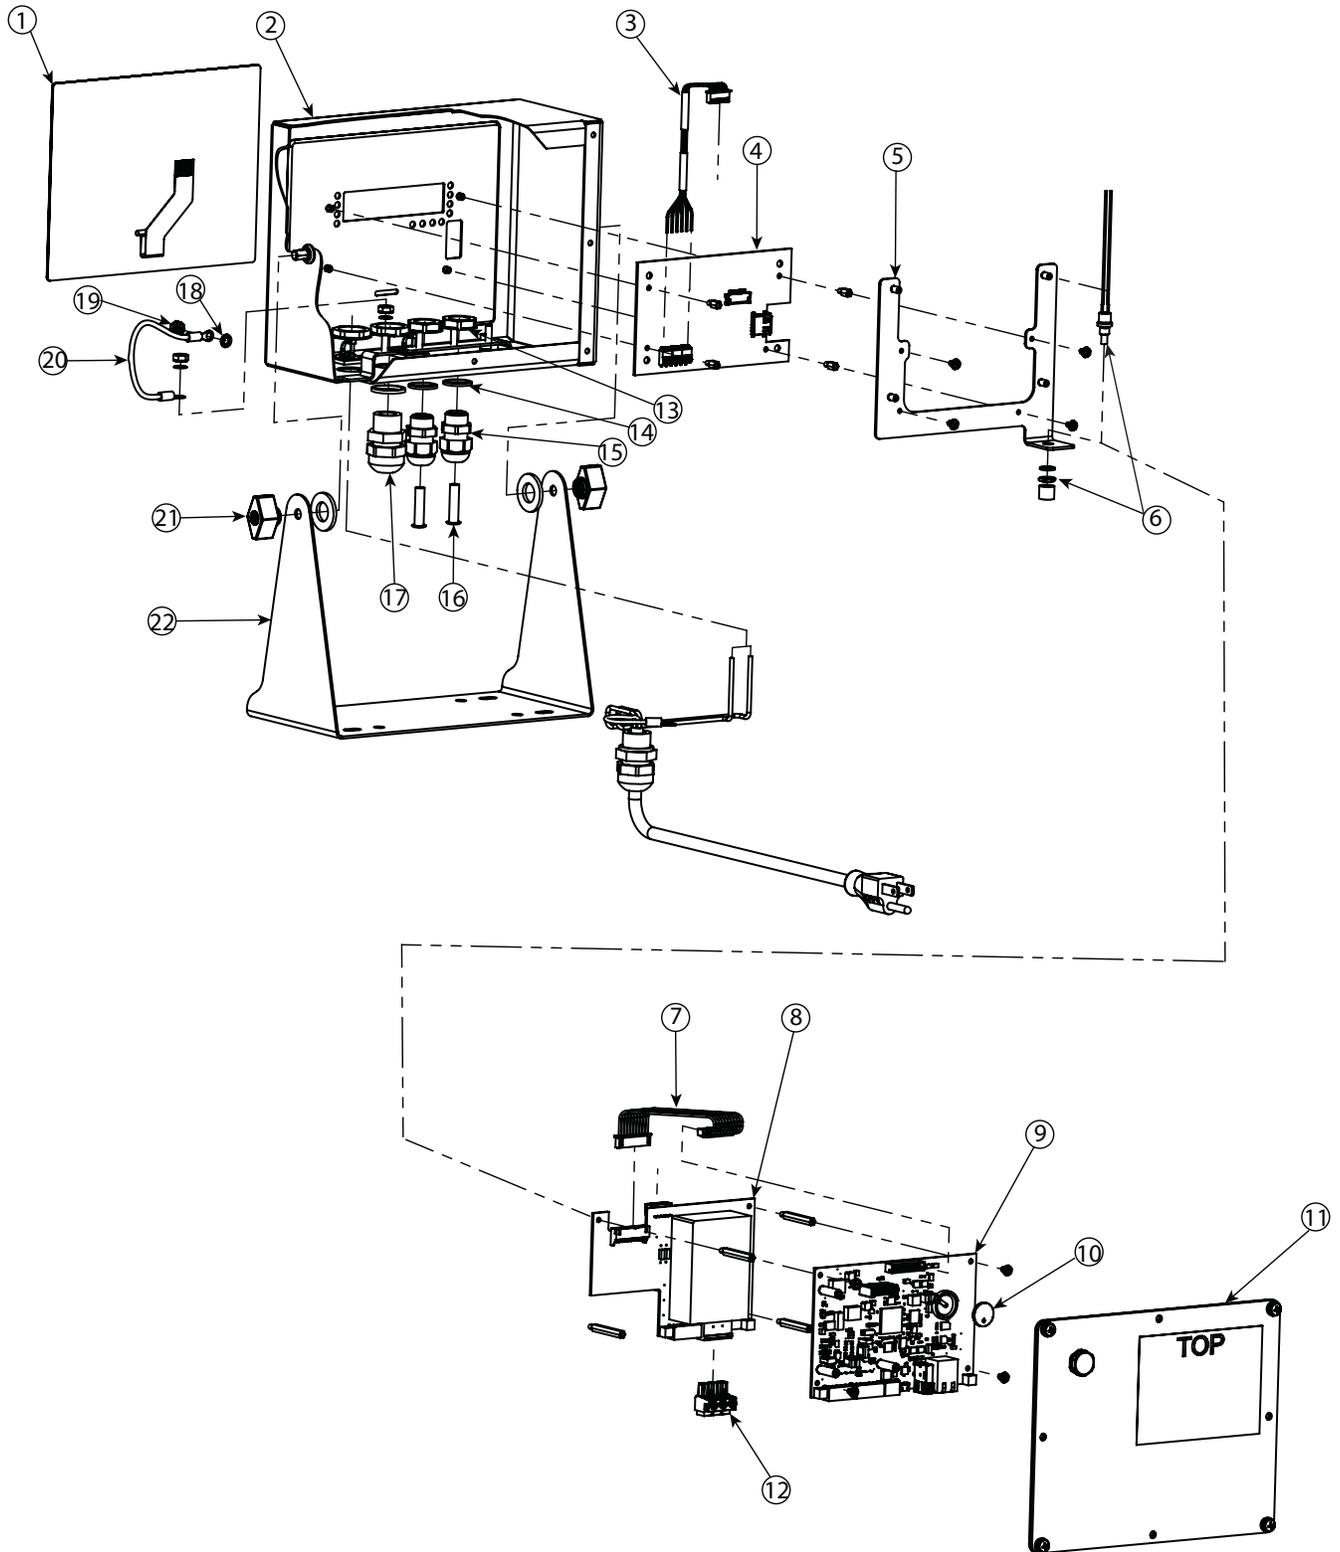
880 Indicator Universal Mount Repair Parts Drawing
